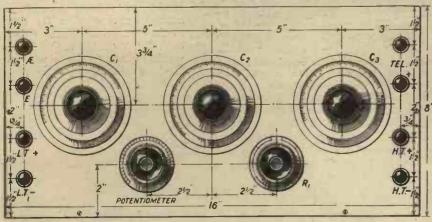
Drilling the panel is a very simple operation, the necessary dimensions being given here.
